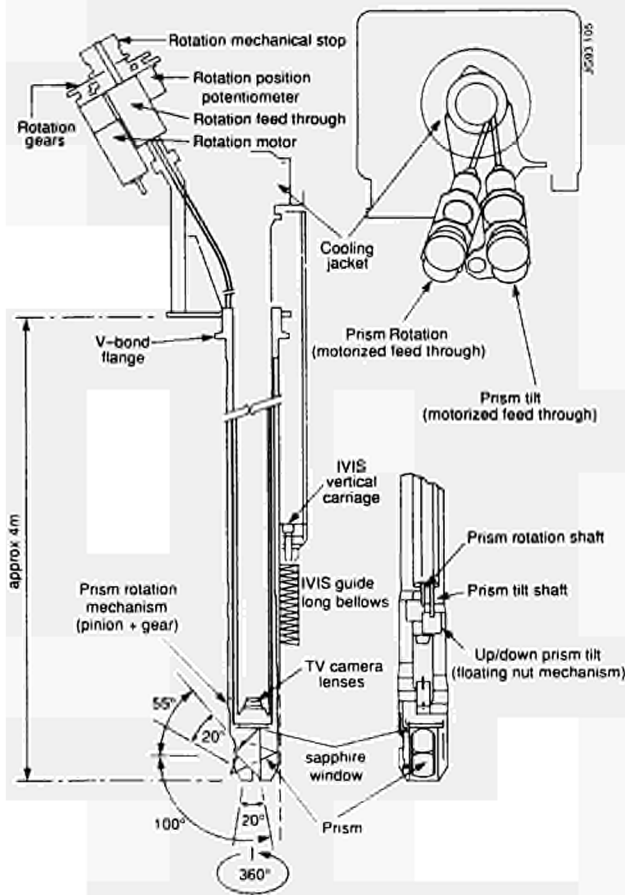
The In-Vessel Inspection System showing a viewing tube with the prism in vacuum manoeuvred through a "wobbling" bellows.
